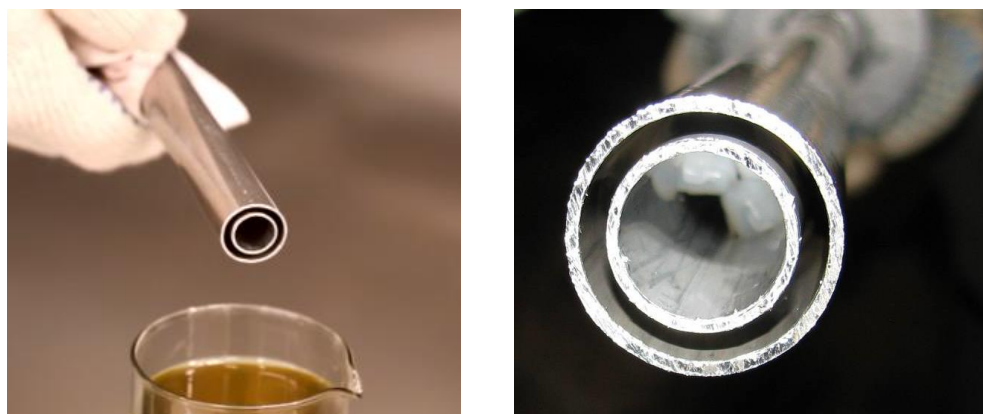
Washing the cut with fuel and checking the cleanliness of the cut
